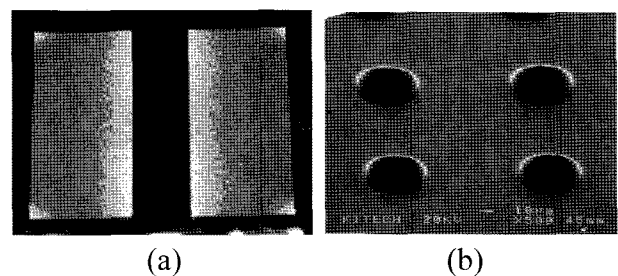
Positive patterned micro-mold with 50 μm micro-lenses ((a) a photograph of mold, (b) SEM image of mold).
